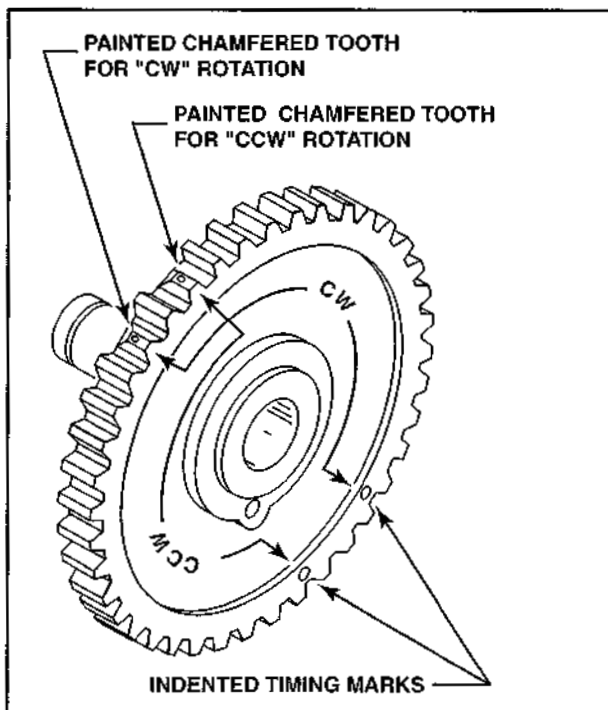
In most magnetos, the same distributor gear can be used for a clockwise rotating magneto or a counter-clockwise rotating magneto. This distributor gear has an indented timing mark for alignment with the drive gear. The drive gear has alignment marks for use in either direction. A painted, chamfered tooth visible through an inspection port corresponds with the timing marks.
